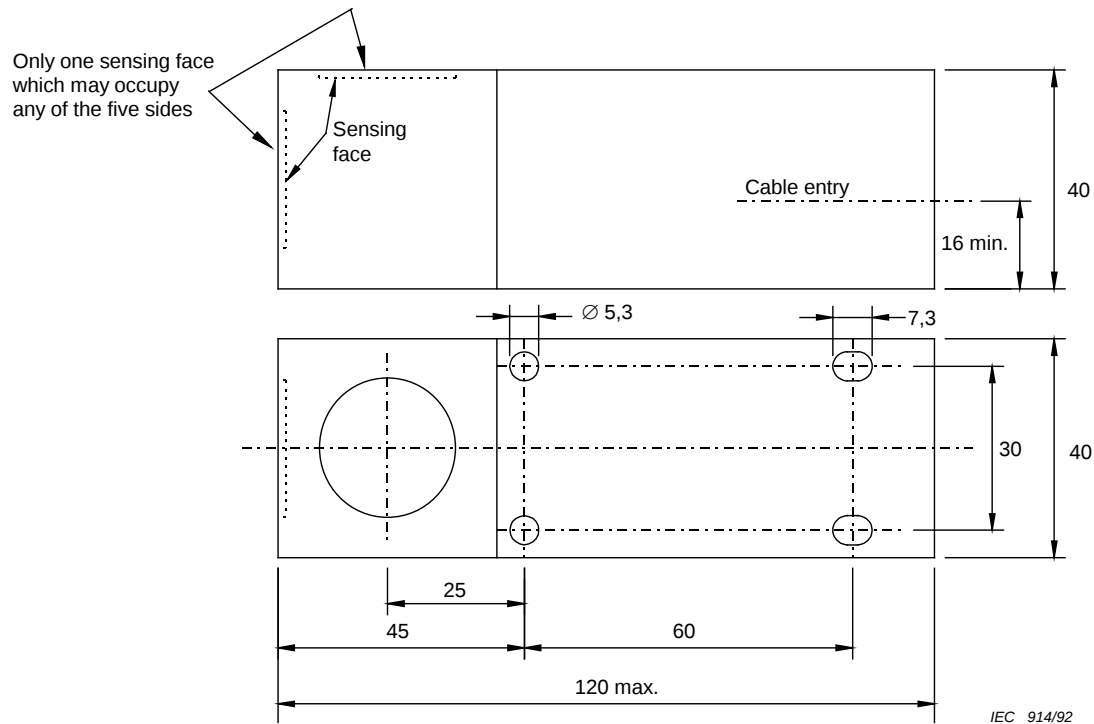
(CC) b – Dimensions, type C40 in millimetres
